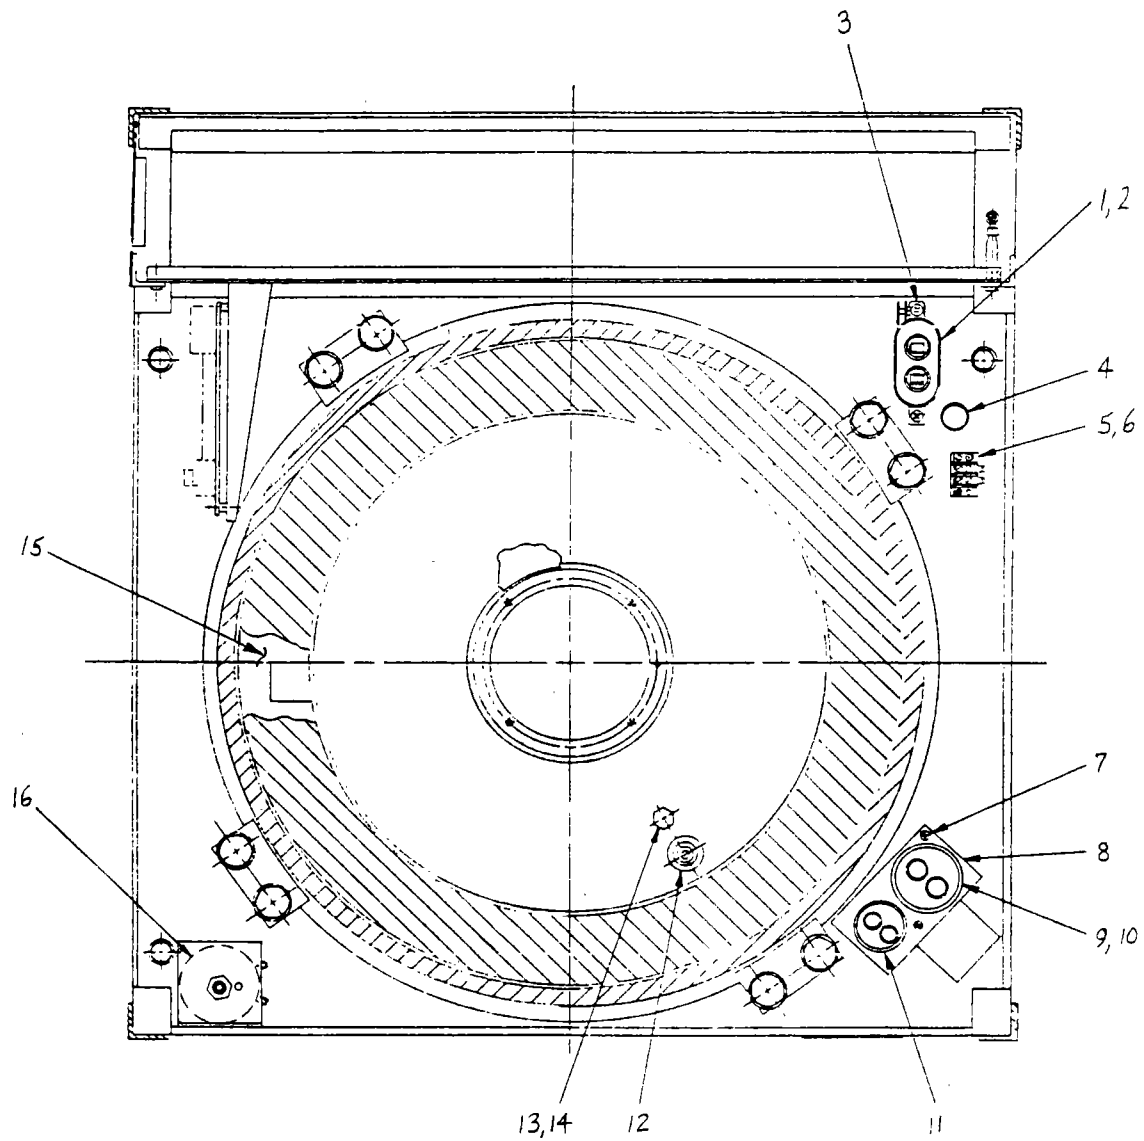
RC-5B PLUS Evaporator Assembly, Top View
